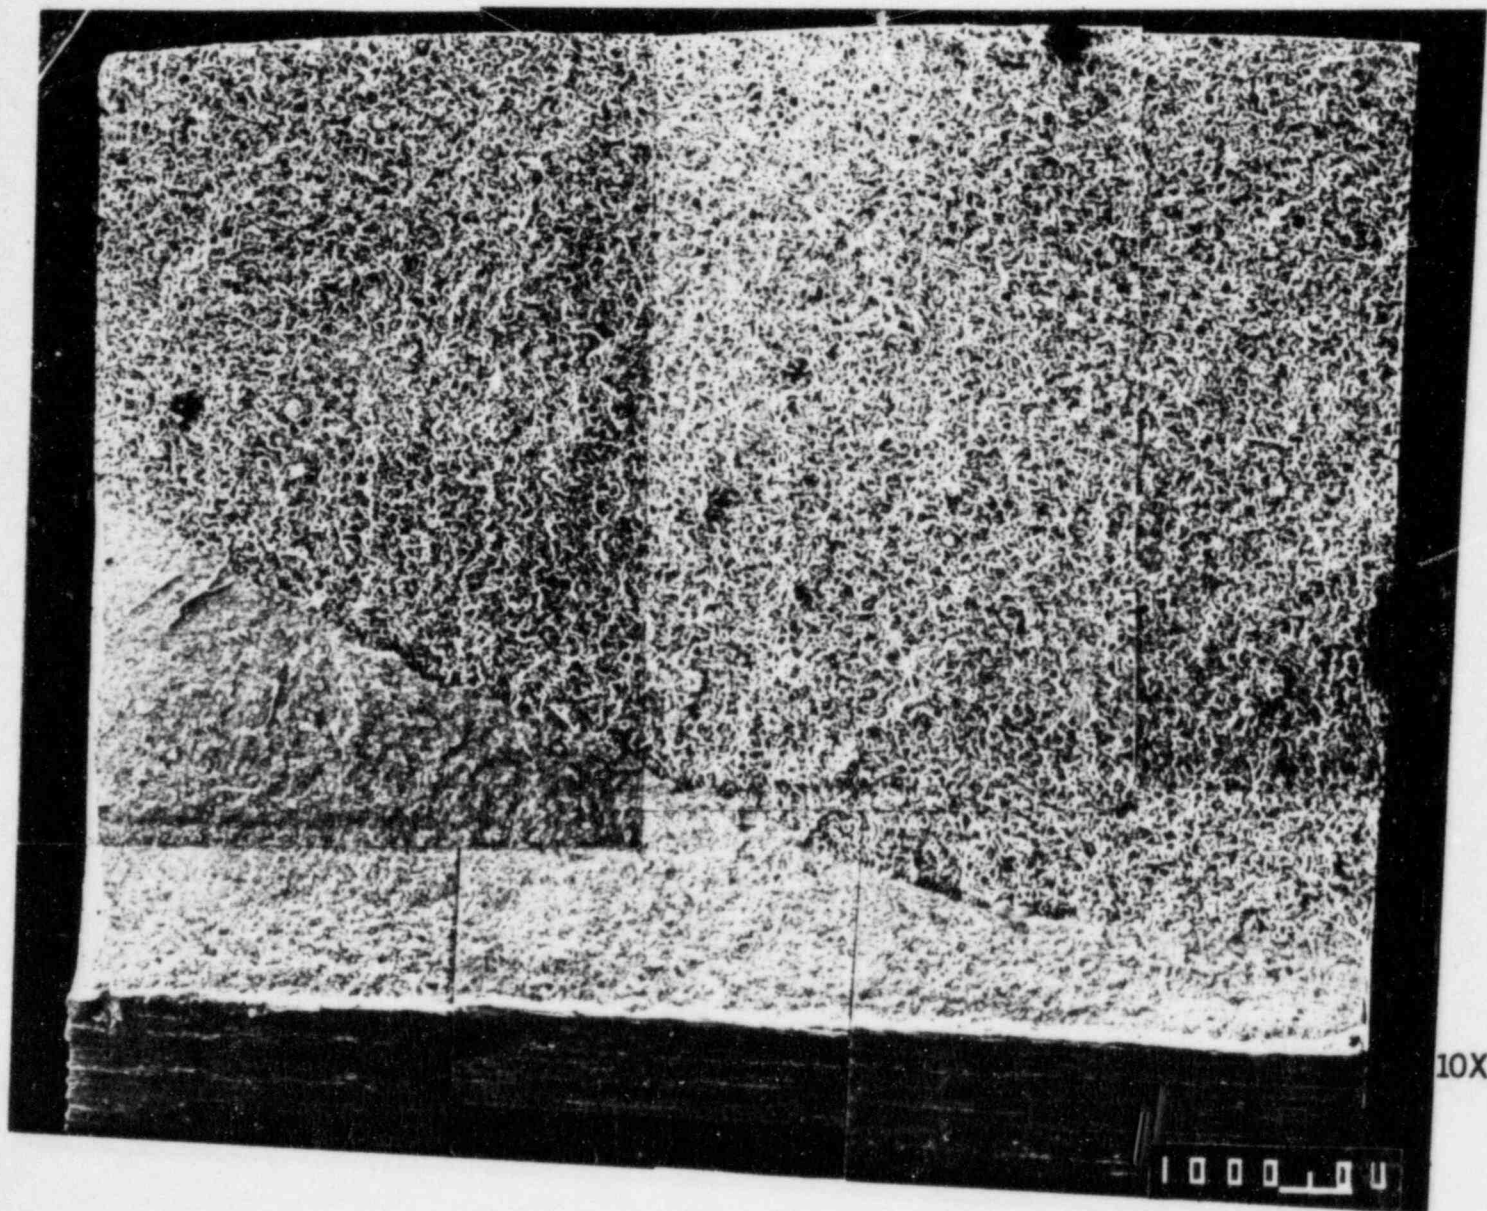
Low magnification fractography of the fracture face from disc #7.
